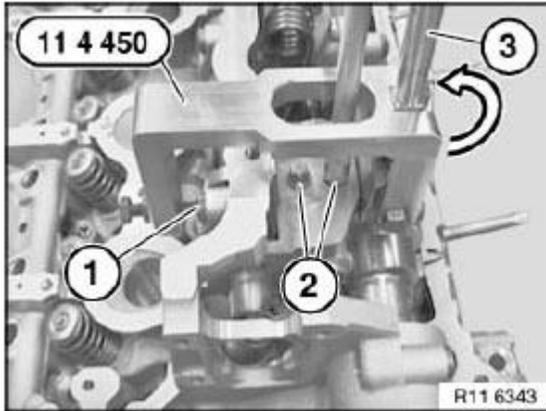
Moving Eccentric Lever On Special Tool (11 4 450)
